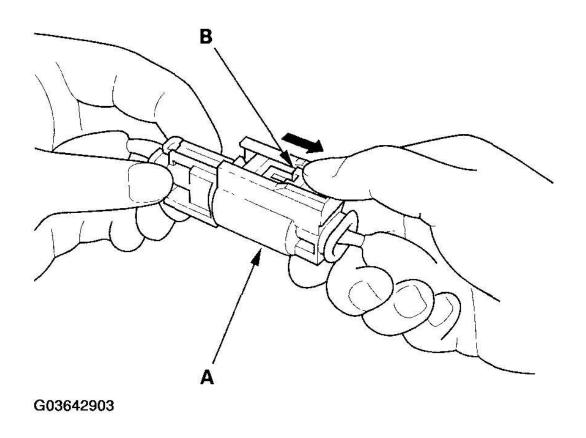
Pulling Spring-Loaded Sleeve And Slider To Release Lock Courtesy of AMERICAN HONDA MOTOR CO., INC.
